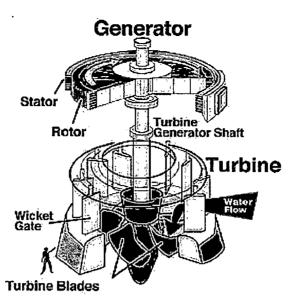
Kaplan turbine and electrical generator cut-away view [42].
